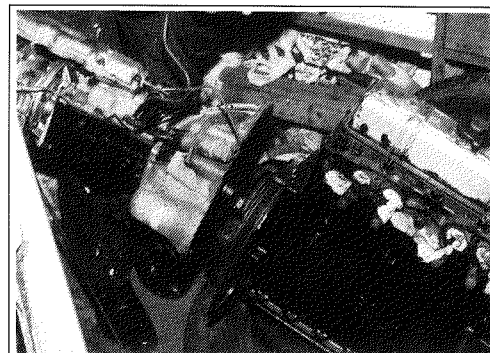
With the engine and gearbox unit secure in a purpose made stand or in this case, the combination of a wheel and tyre and a block of wood, split the gearbox away from
